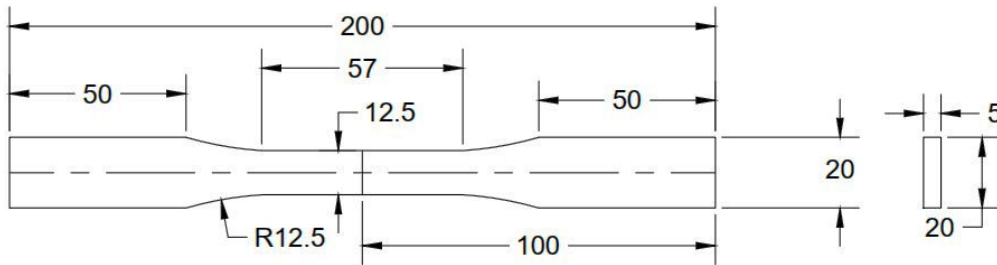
ASTM Standard (E8/E8M-13a) for Weld Specimen Design
